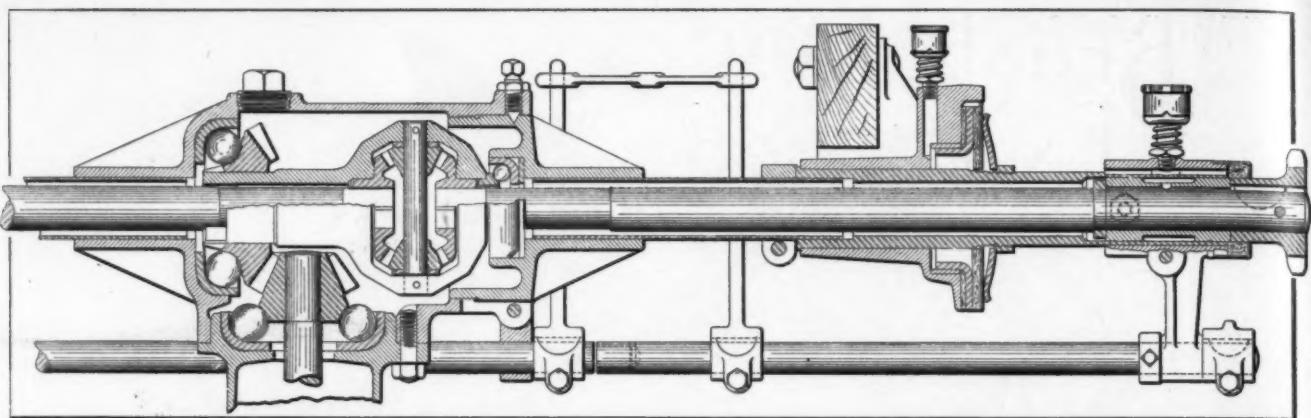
Depicting jackshaft in section with differential and large ball bearings for the bevel drive
